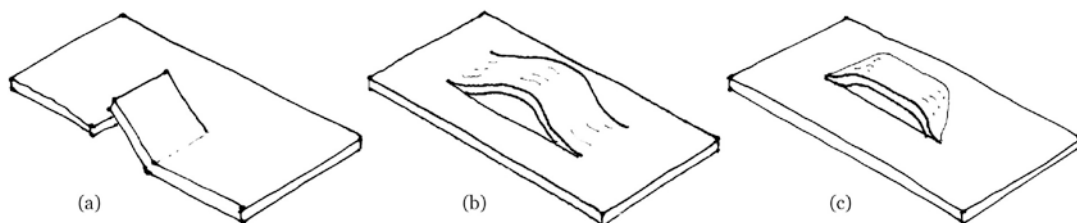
(a): cutting and bending. (b) and (c): two types of cutting and forming
